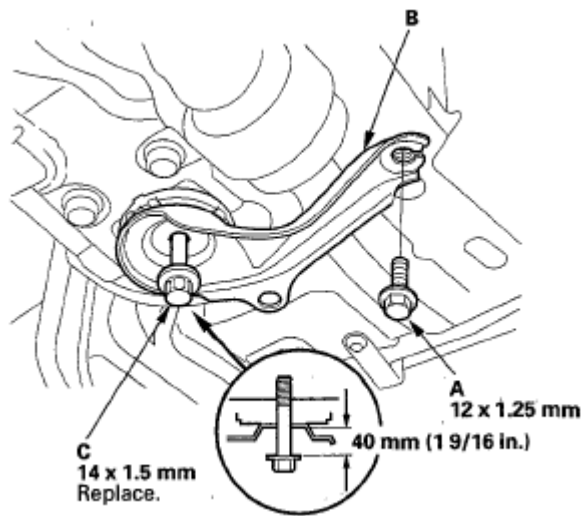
Identifying Mounting Bolts From Front Subframe Rear Brackets
